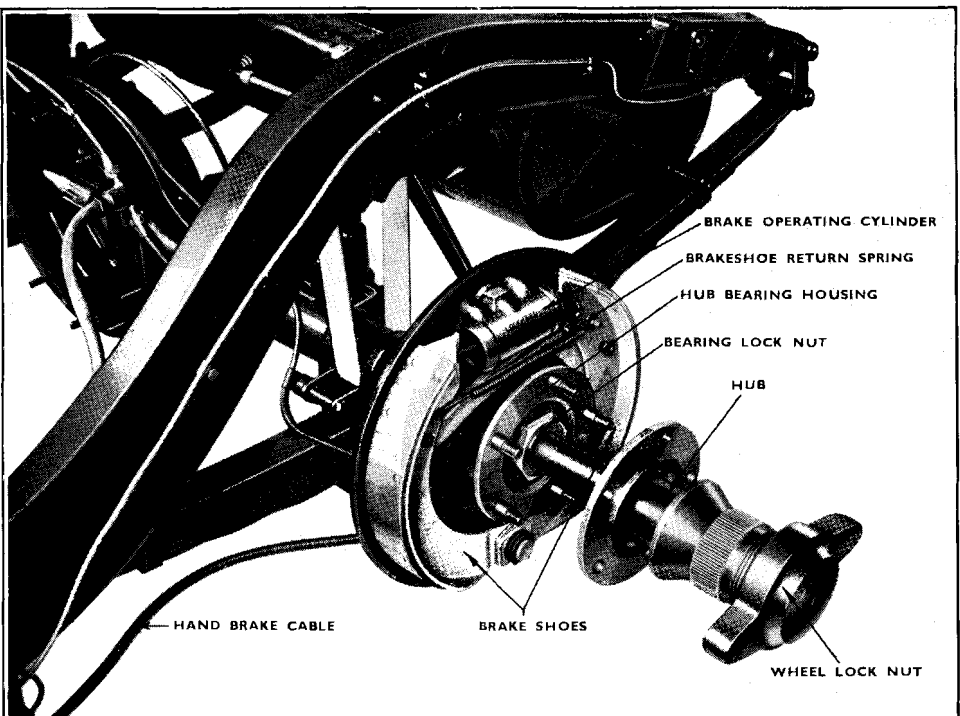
Illustration No. 3.—The near-side hub and brake after the wheel and brake drum have been removed to show the details.
